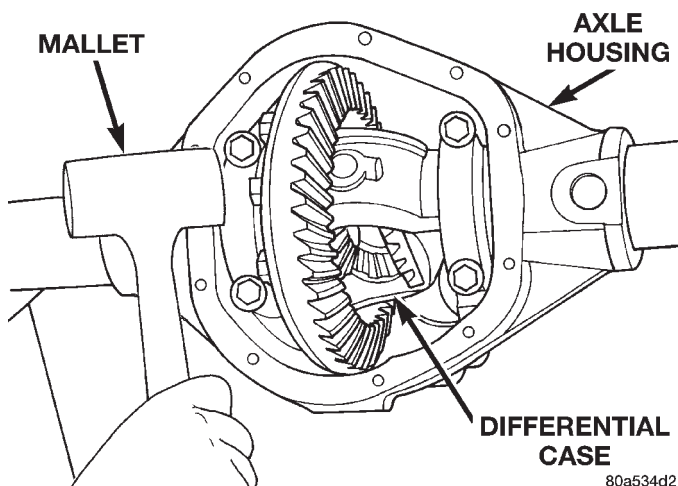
Seat Pinion Gear Side Differential Dummy Side Bearing
